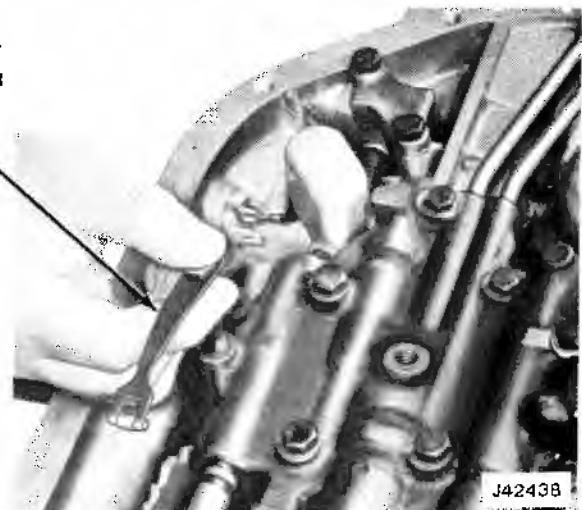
Removing or Installing Detent Roller Assembly and Spring
